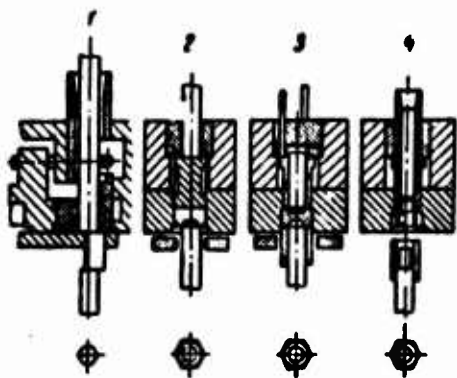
Diagram of the process of hot volume stamping of a nut: 1 - section of blank; 2 - preliminary stamping of nut; 3 - final embossing of the hexahedron; 4 - puncture of hole.
